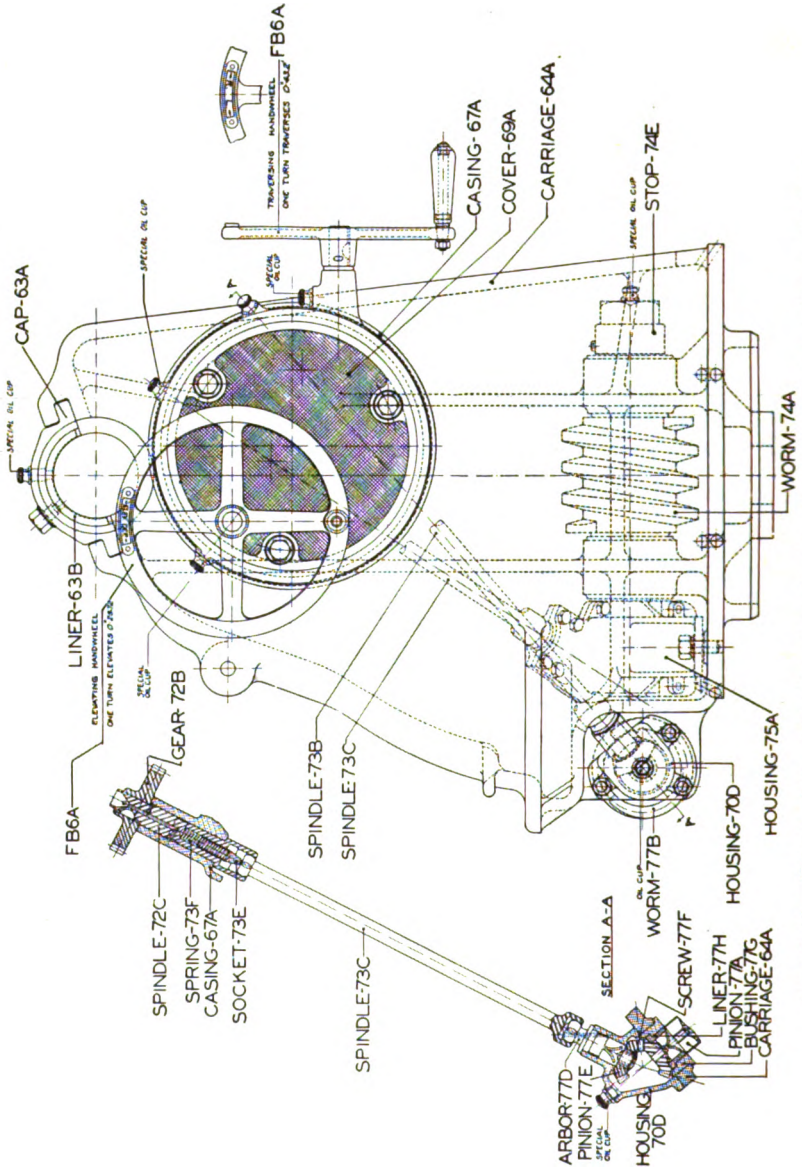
Top carriage—left side view showing elevating and traversing mechanism
